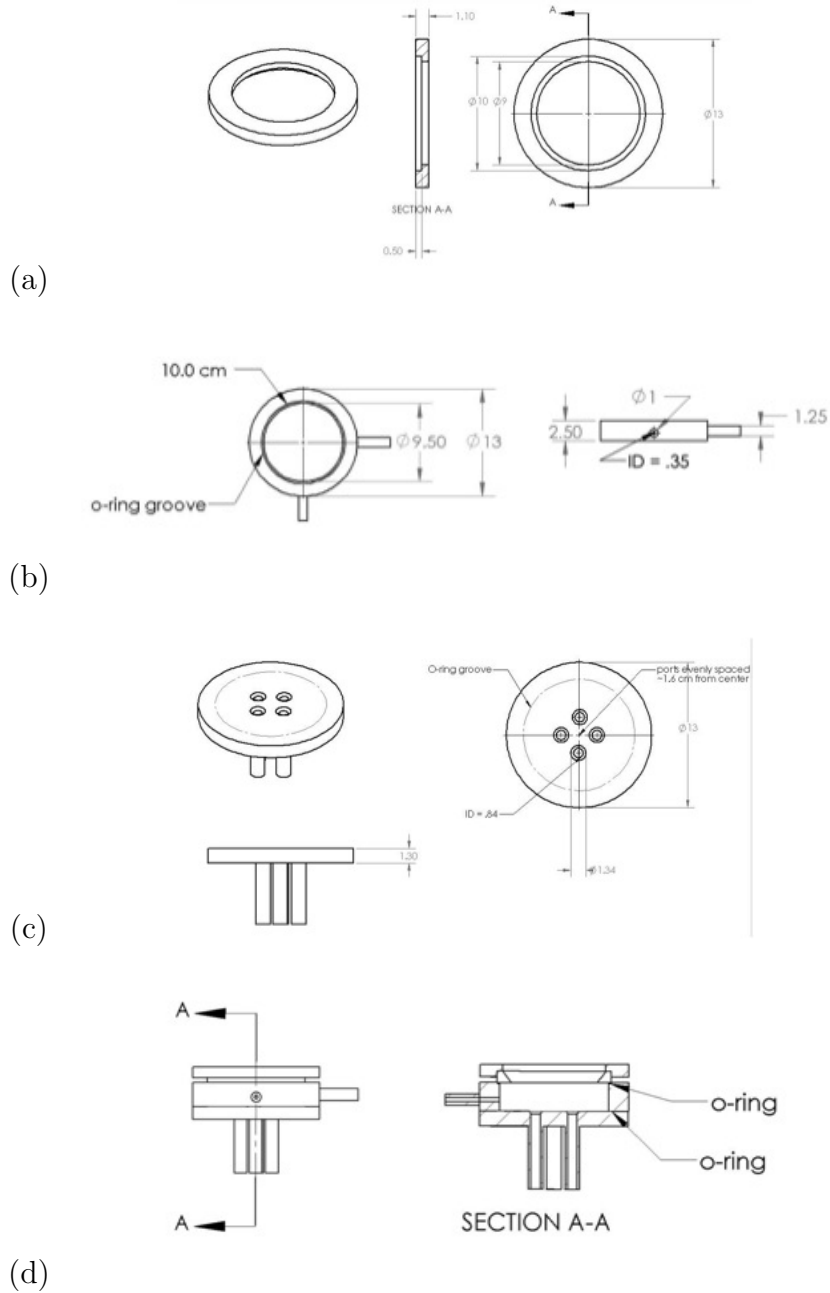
Custom pressure chamber: (a) top ring, (b) main chamber, (c) bottom plate, (d) complete assembly.
